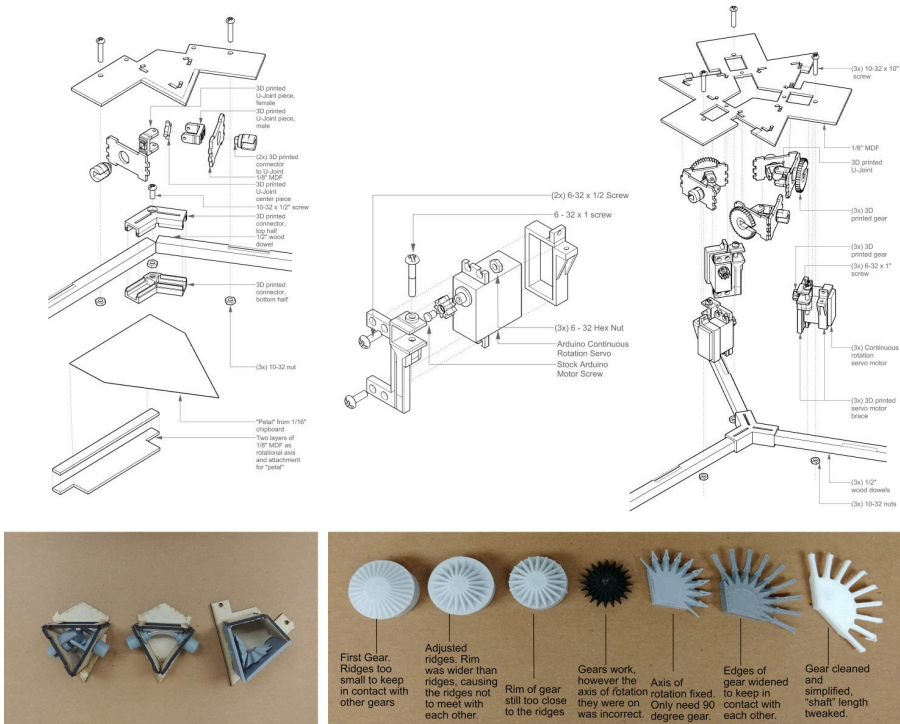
Rapid prototyping of alternatives to gearbox and exploded axon of actuating mechanism.
